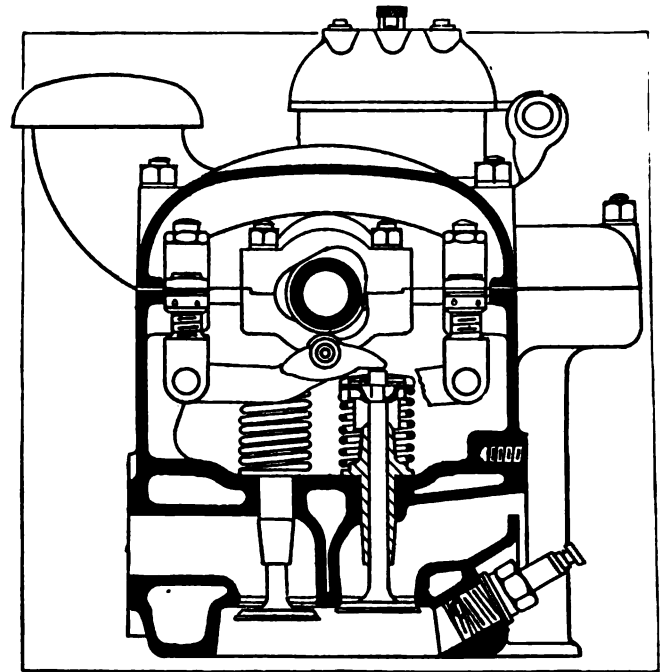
Valve Operating Gear of the Chalmers Automobile Engine
